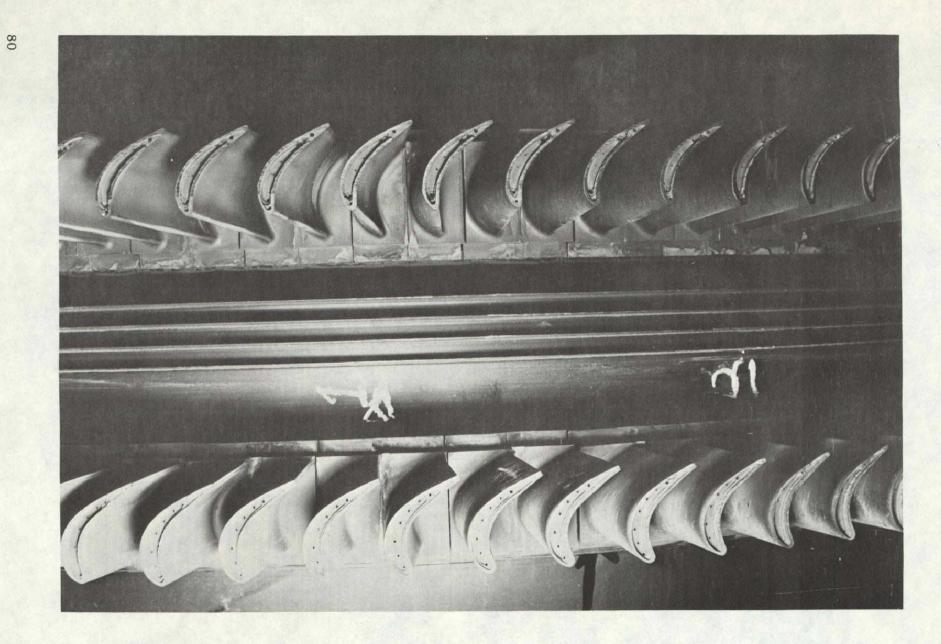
HP Turbine Rotor, Blade Tip Rubs.
